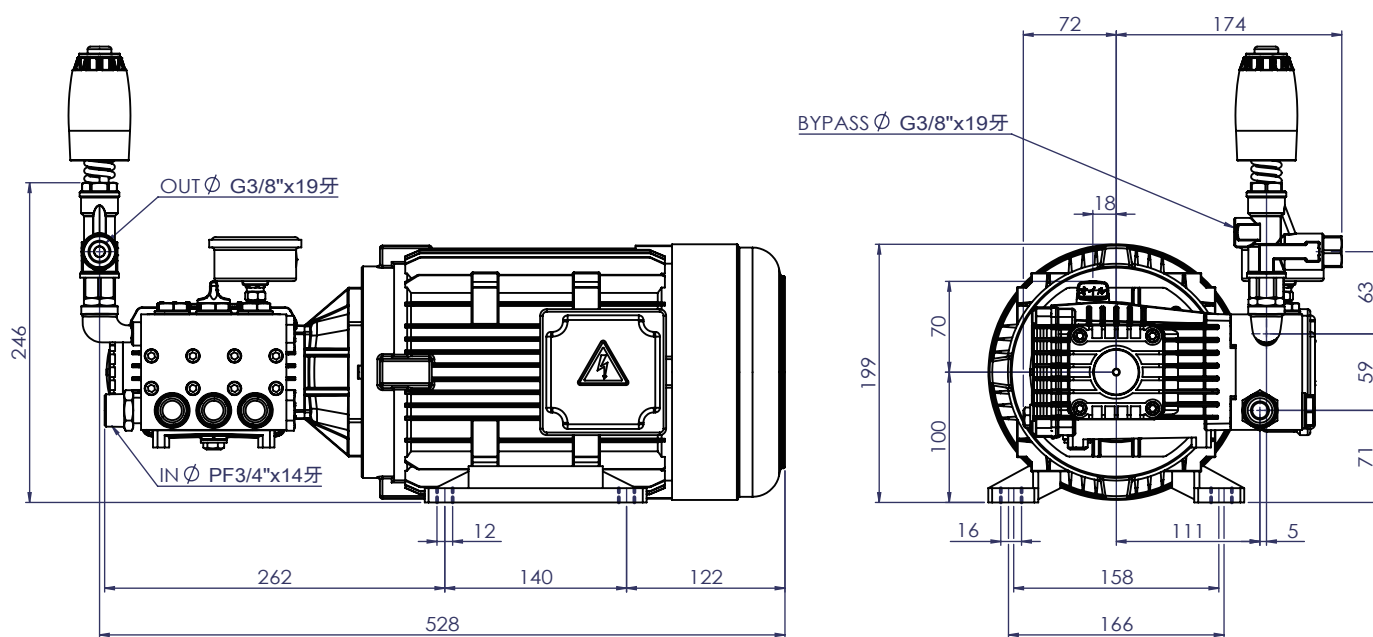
motor with overload protector. Die-casting aluminum. IE1 or IE3 are available.
